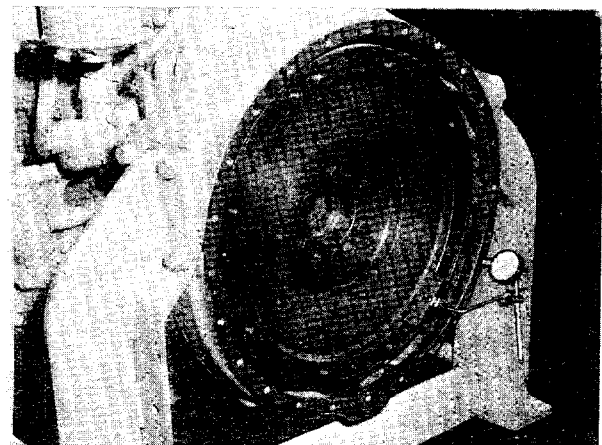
CHECKING ENGINE FLYWHEEL HOUSING RUNOUT
